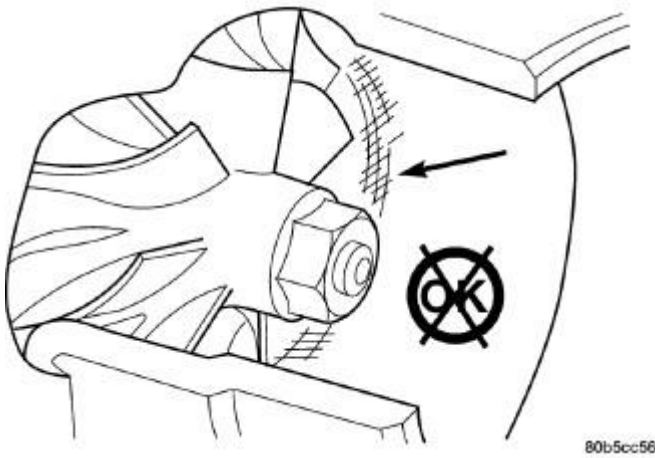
Inspecting Compressor Housing For Impeller Rubbing Condition
